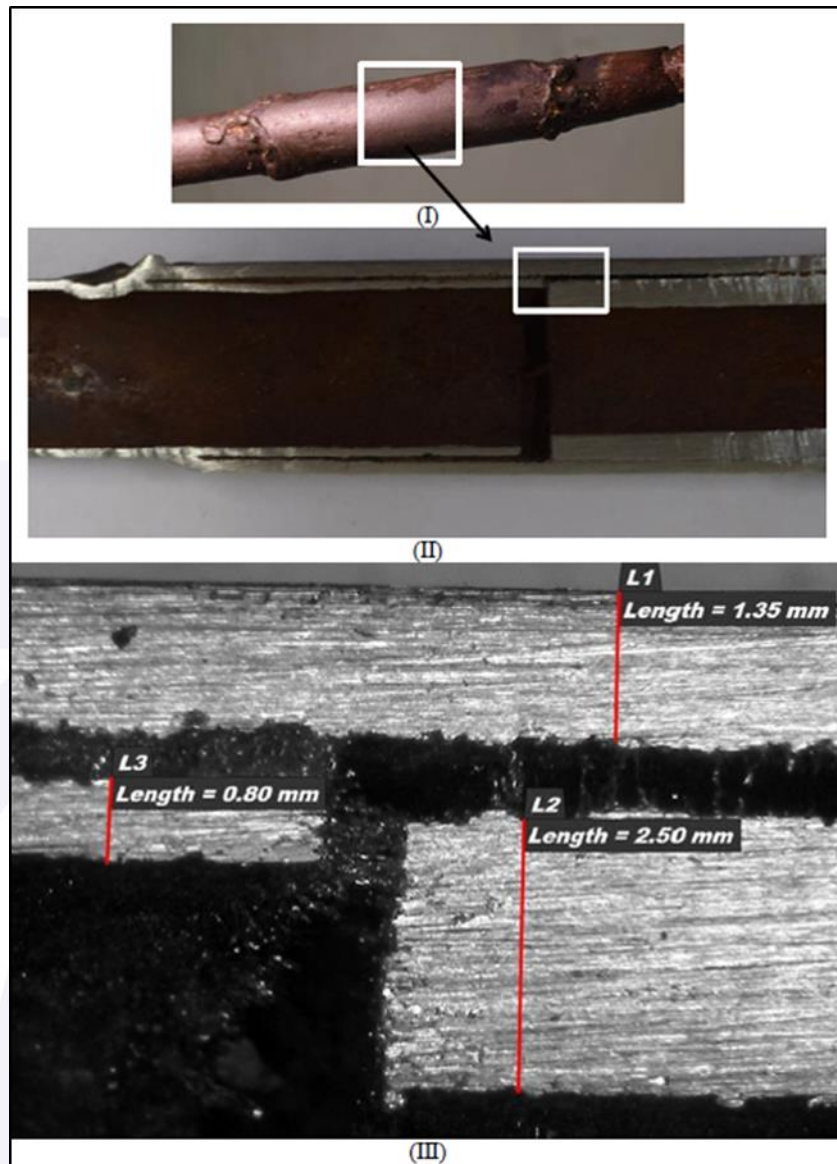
Internal view of the right lower truss tube showing the thickness of the welded tubes.
